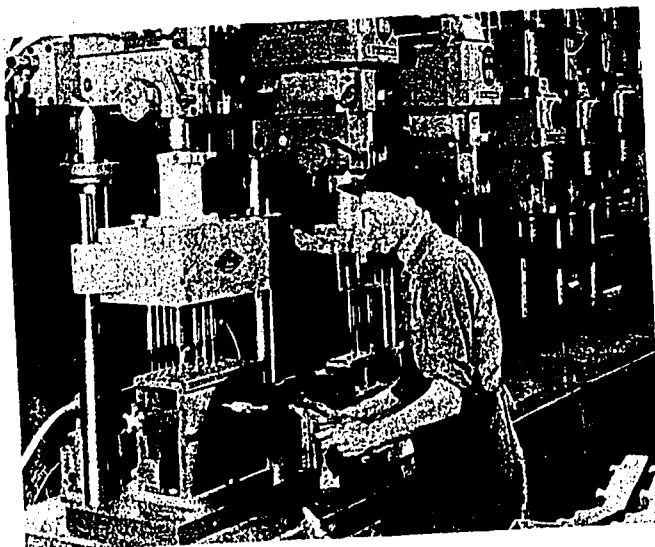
Drilling machines come in many different sizes. This drill has multiple spindles.
